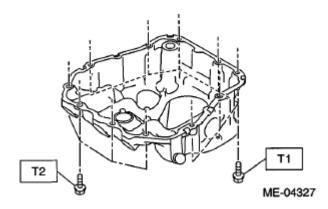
Identifying Cylinder Block Lower And Bolts Courtesy of SUBARU OF AMERICA, INC.
